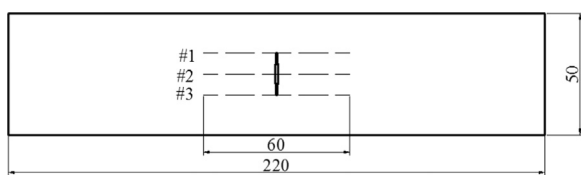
Shape of sheet specimen (in mm), and the scanning lines.
